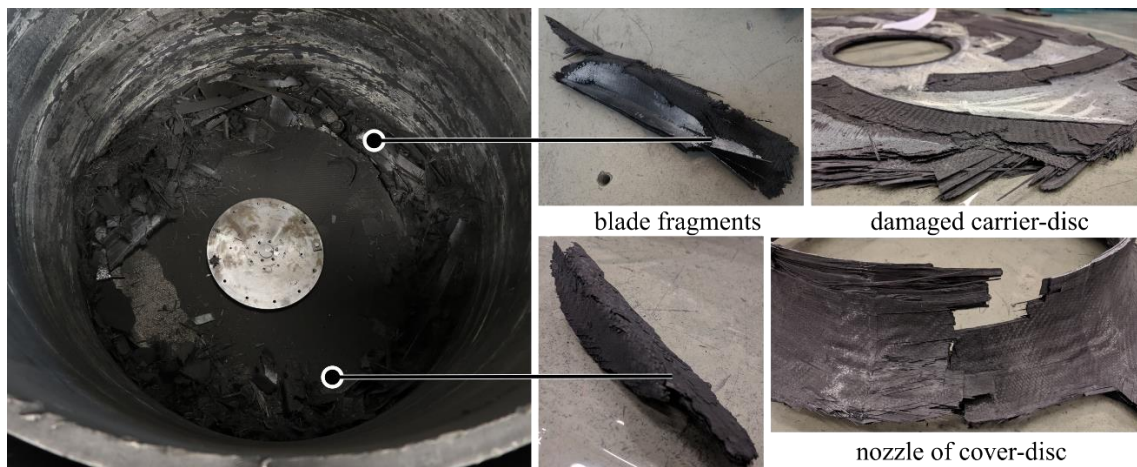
burst impeller (left) and fragments of the bursted impeller (right)
